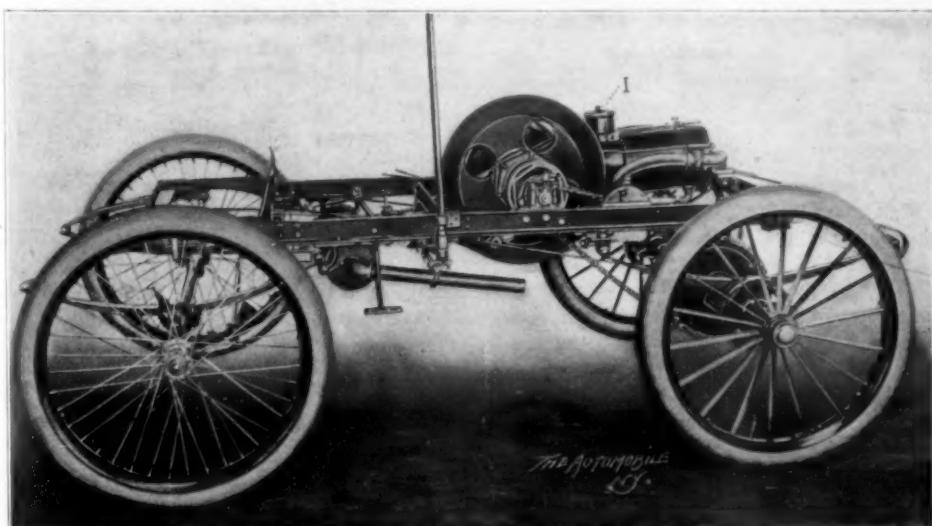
SIDE ELEVATION OF RUNNING GEAR AND MACHINERY.
